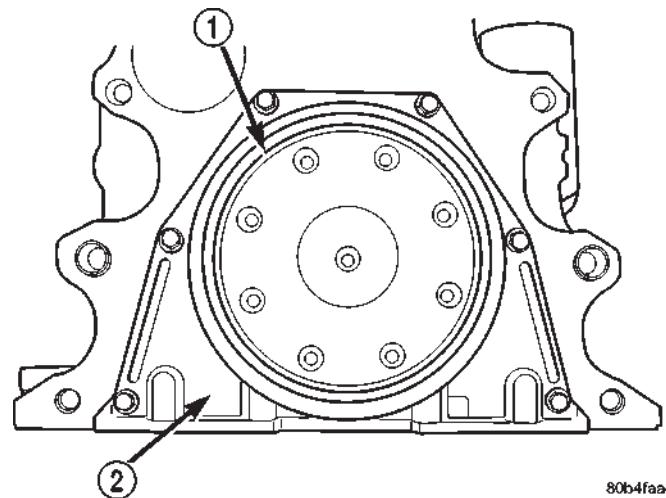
Crankshaft Rear Seal Retainer and Gasket
